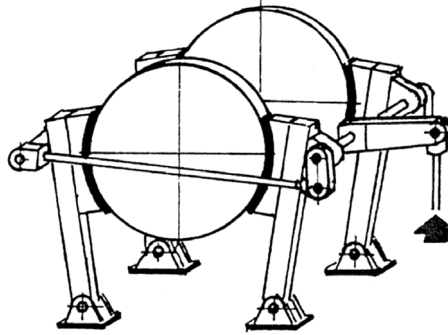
A lower shortening brake shoe assembly with a pushing drive (seemingly dual)
